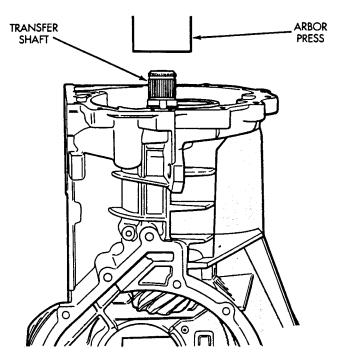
Press Transfer Shaft Downward to Remove Rear Cone
